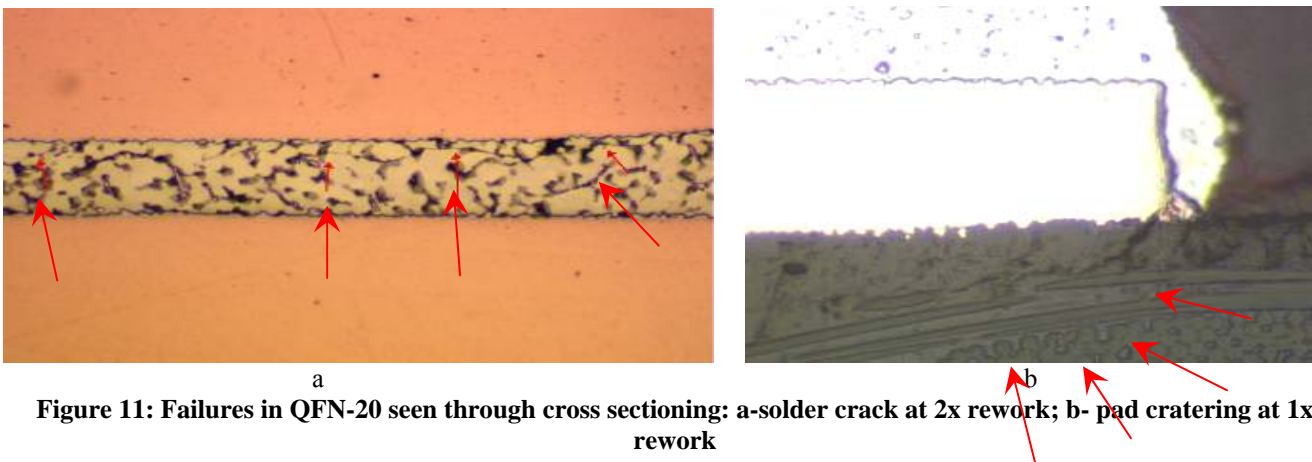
Failures in QFN-20 seen through cross sectioning: a-solder crack at 2x rework; b- pad cratering at 1x rework
